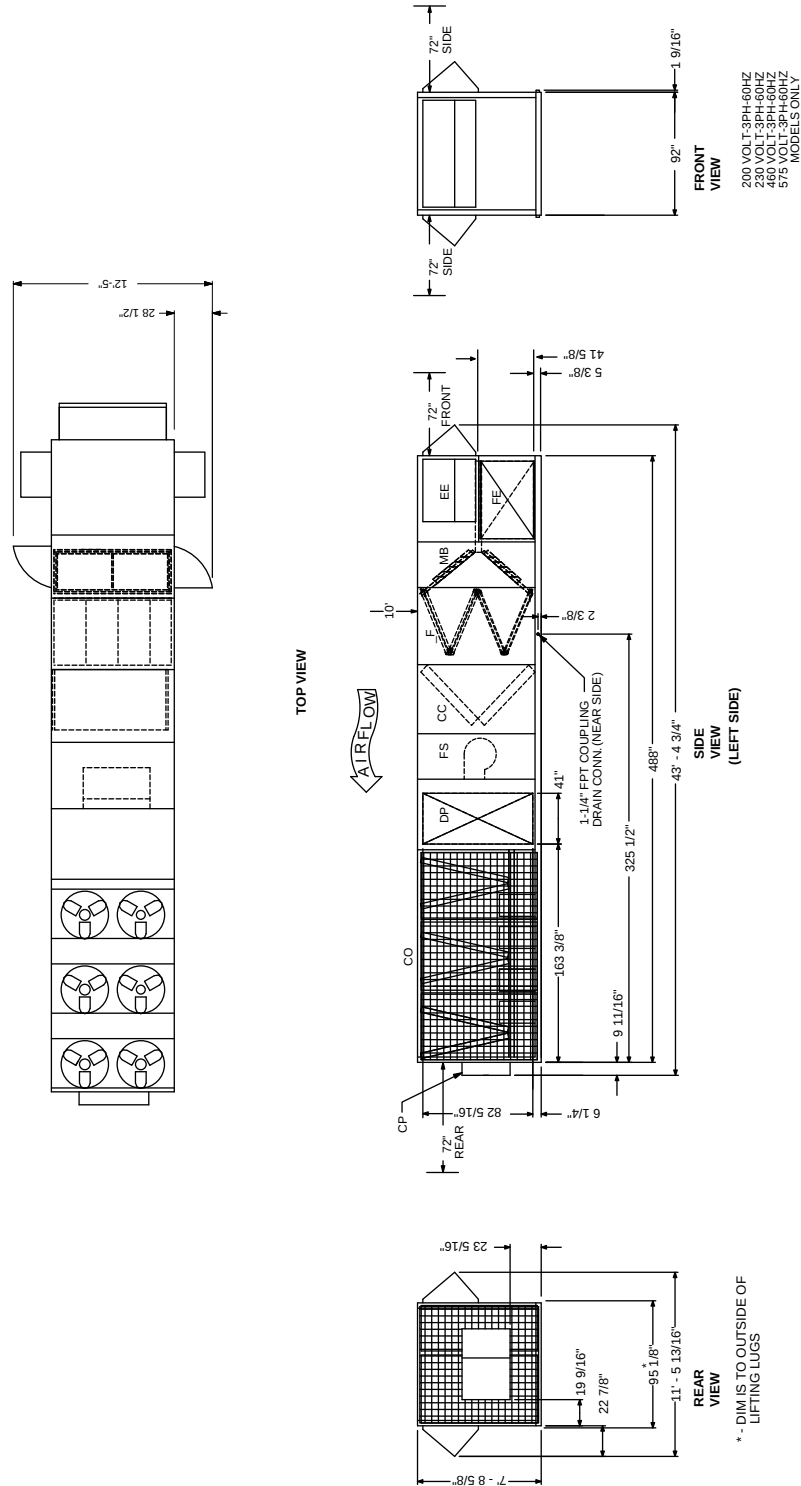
GENERAL ARRANGEMENT DRAWING
